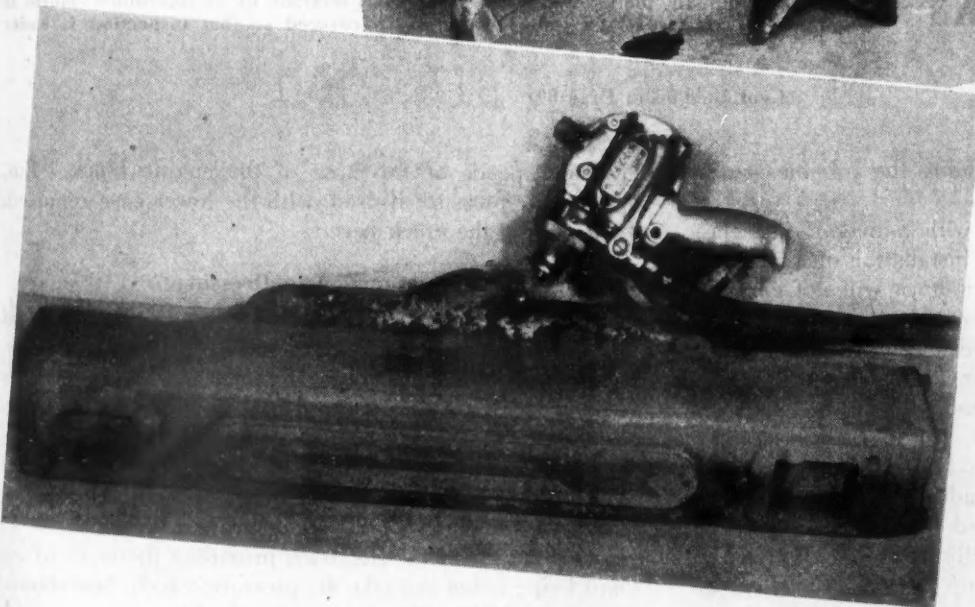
, left. Small cracks which showed up after the welding were sealed off with a metal spray gun. The manifold was again pressure tested and returned to service
